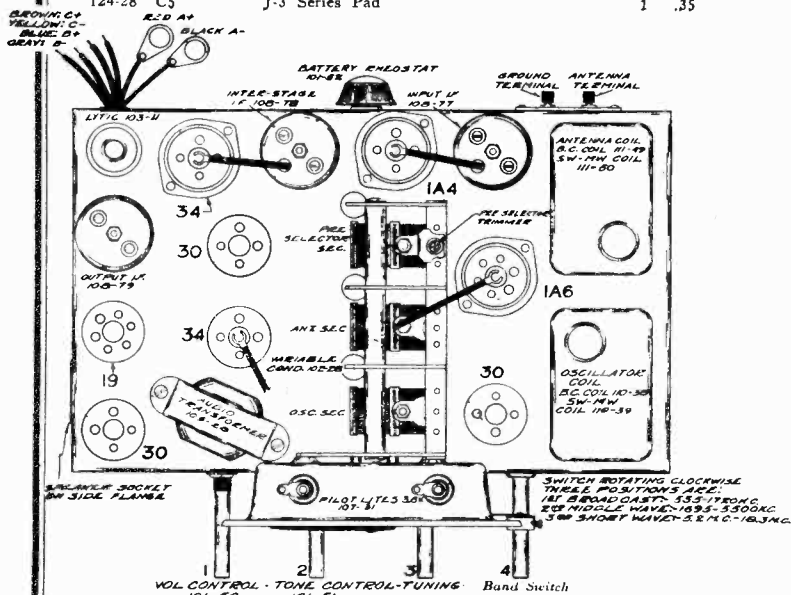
BOTTOM VIEW SHOWING TRIMMERS
